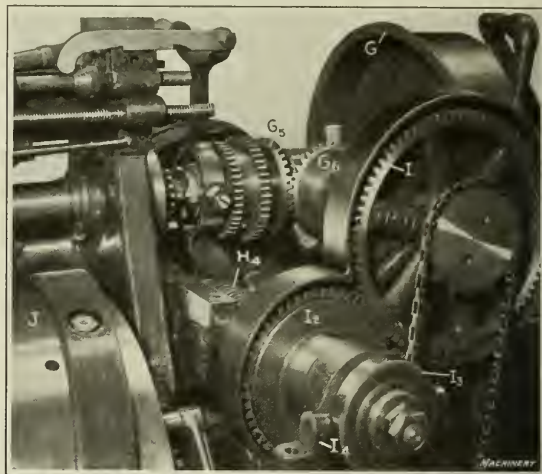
Partially Dismantled View of  $\frac{3}{4}$ -inch Machine, showing Power-feed Mechanism. Note that No Idler Gear is used on Fast-speed Mechanism
